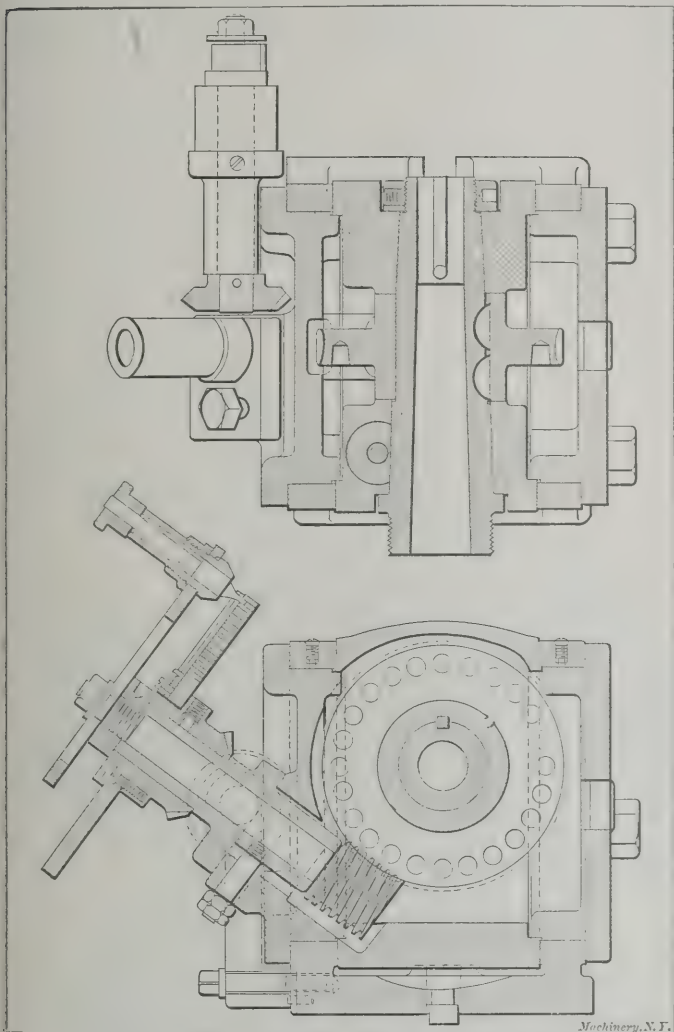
Horizontal and Vertical Sections of Dividing Head
